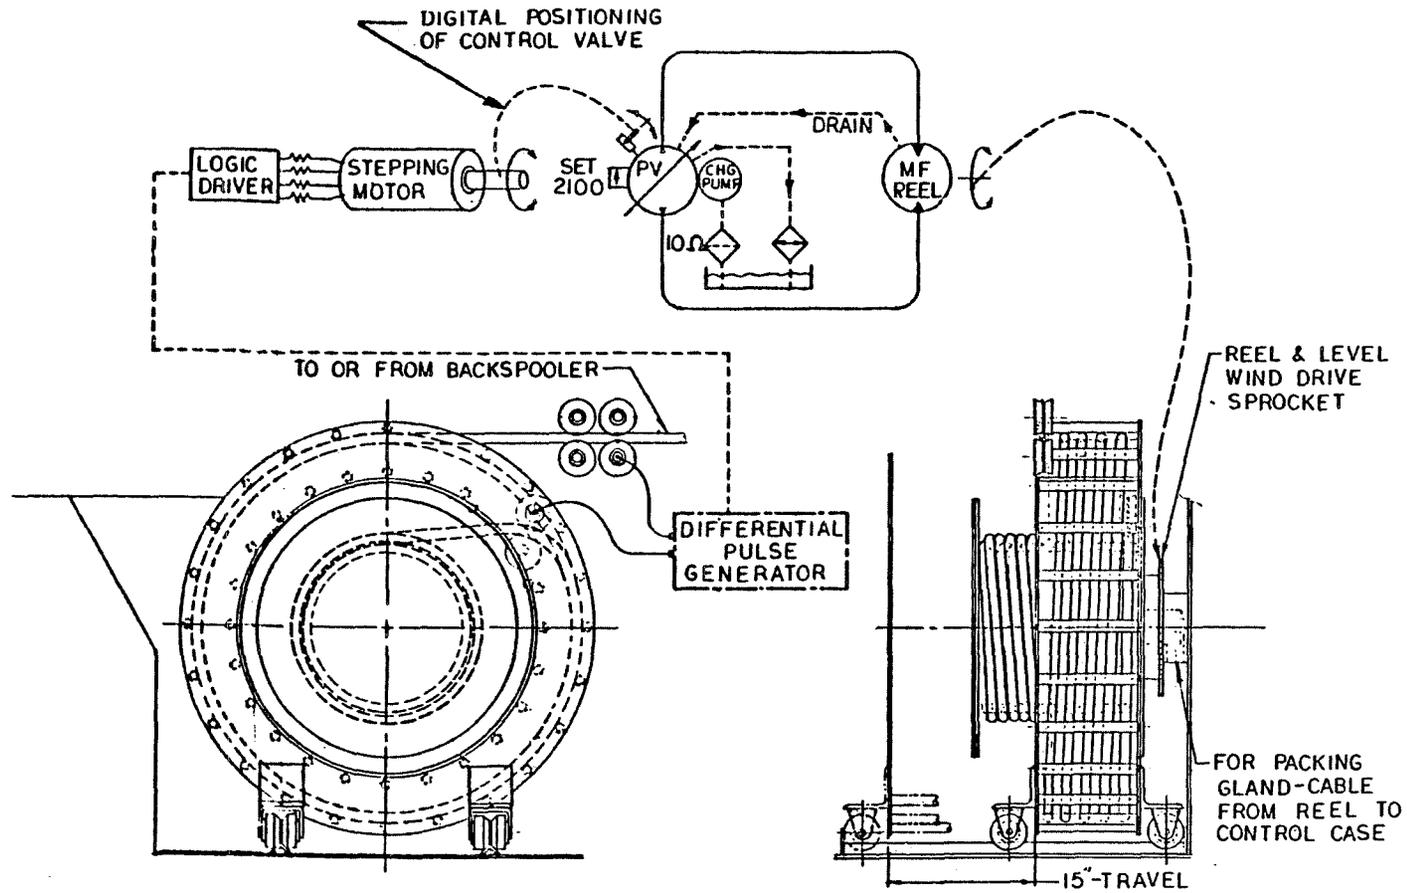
CONCENTRIC CABLE CAGE CONCEPT
